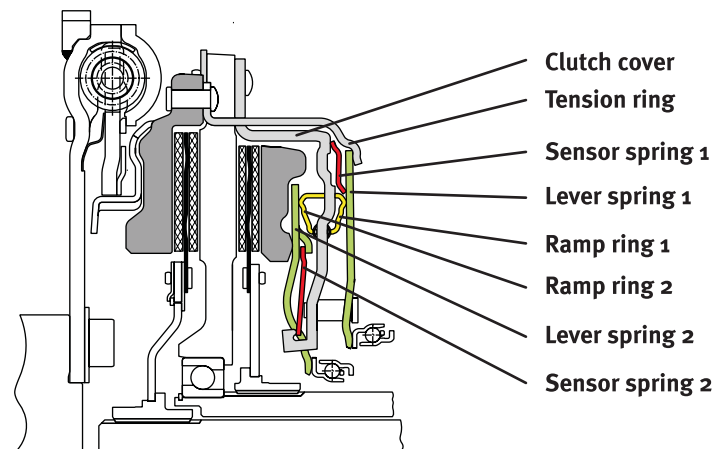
Double clutch with load-controlled wear adjustment LAC (Load Adjusted Clutch)
